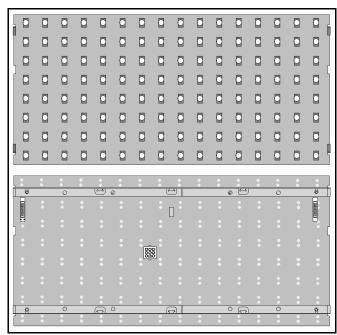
Lampbank (Lamp Side shown at top, Solder Side shown at bottom)
